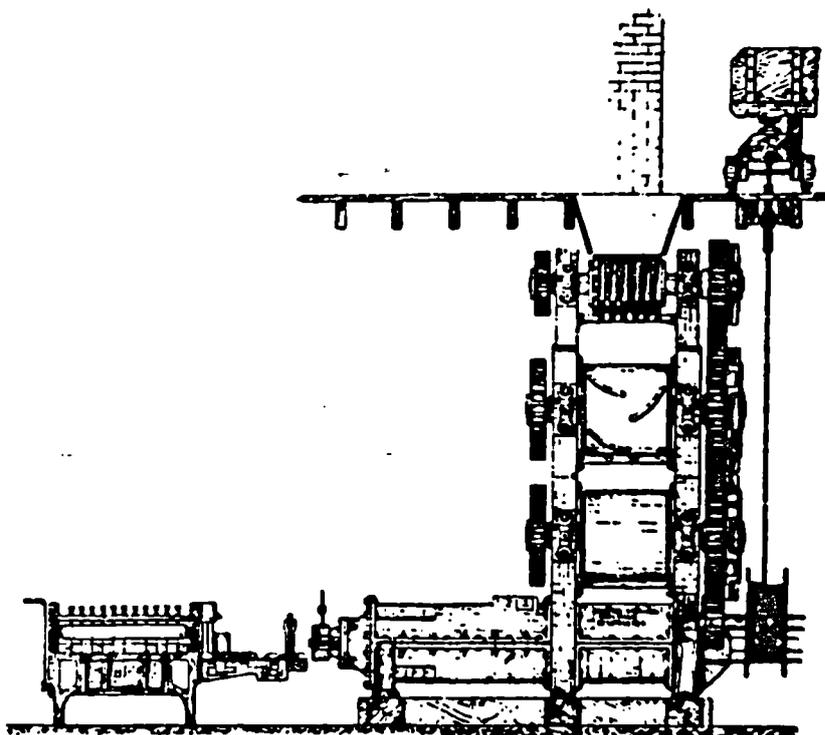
Henry Clayton's Universal "A 1" Combined Three-Process Brick Machine.
